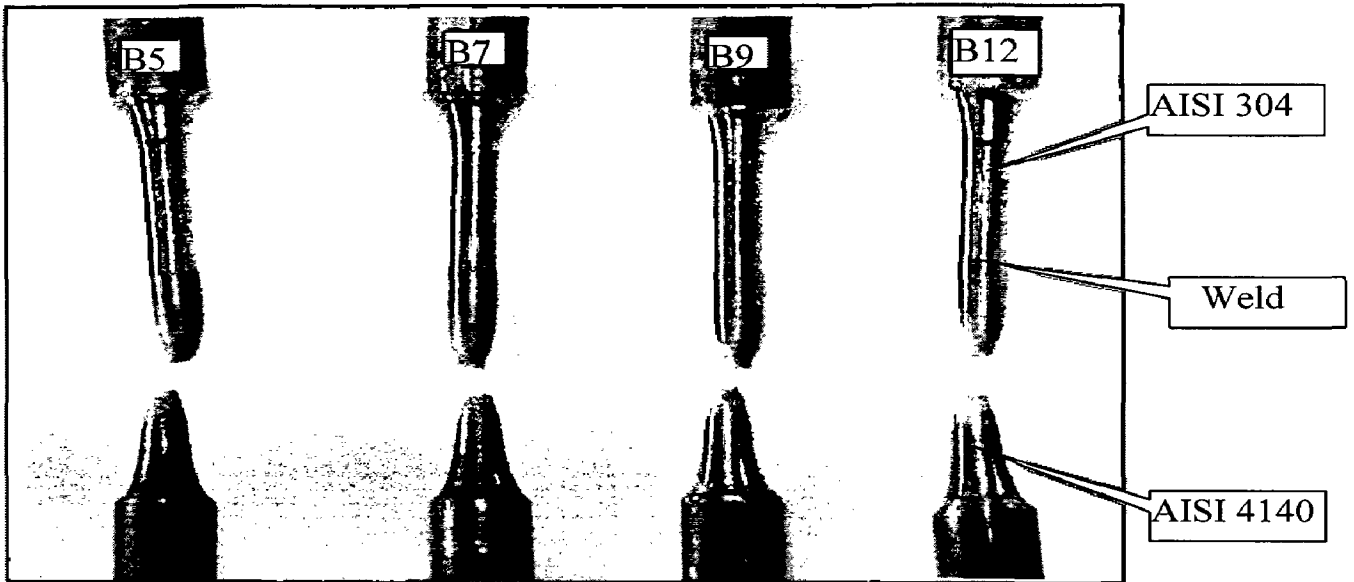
Photograph for fractured tensile specimen of friction welded specimen
